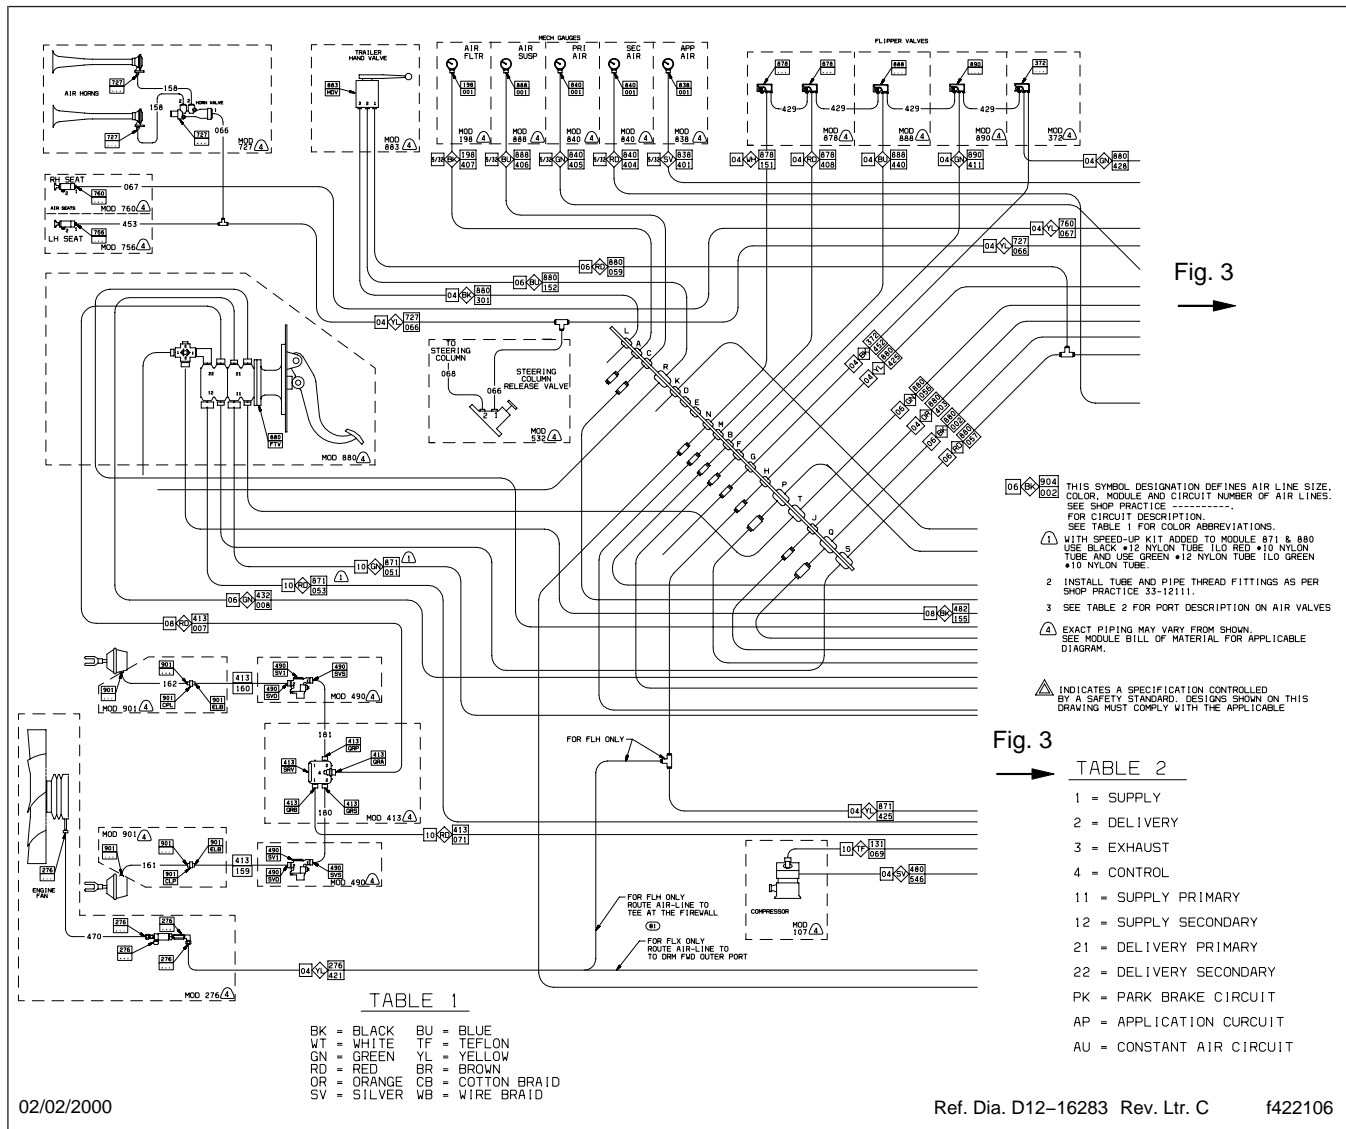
, Air Brake Plumbing, Two Dash Valves/Integral Bendix DRM Air Dryer (partial view)
